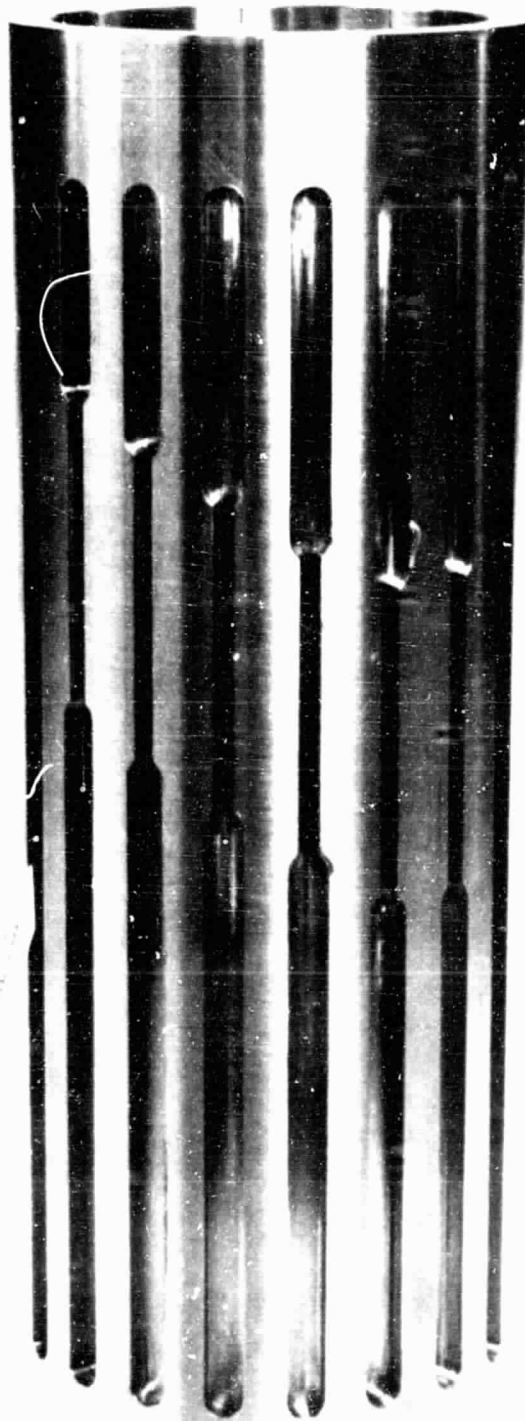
Photograph of the Stainless Steel Inner Cylinder
